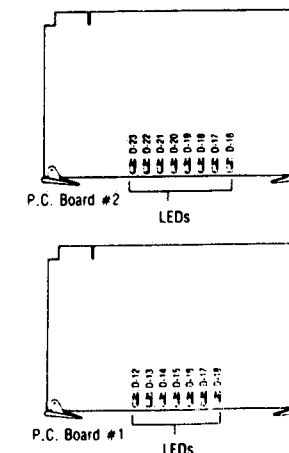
PRINTED CIRCUIT BOARDS AND LEDs.
